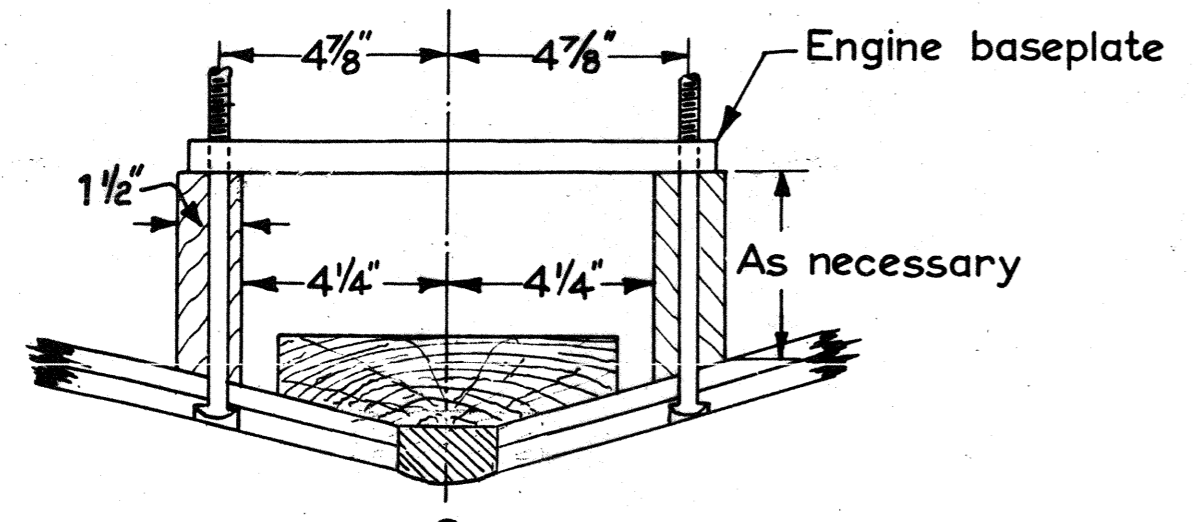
DETAILS OF RUDDER SKEG & MOUNTING WITH INBOARD ENGINE INSTALLED ON CENTRELINE
